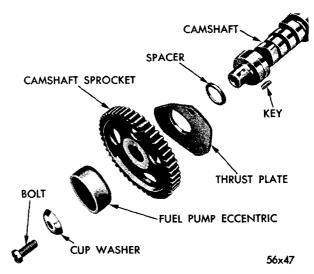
Camshaft Drive Parts (Disassembled View)
